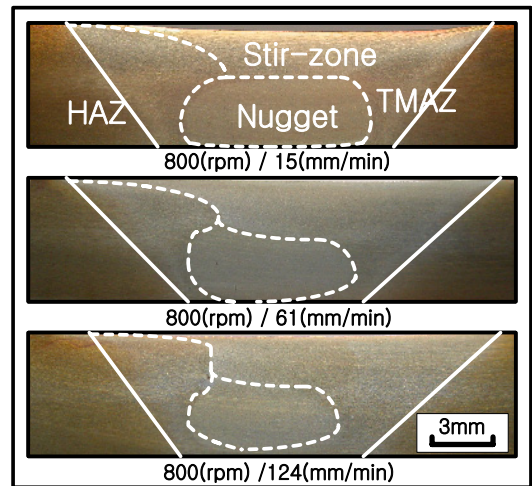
Welded transverse cross-section macrostructures according to the welding speed 800rpm and the transition speeds 15mm/min with half screw type tool.
